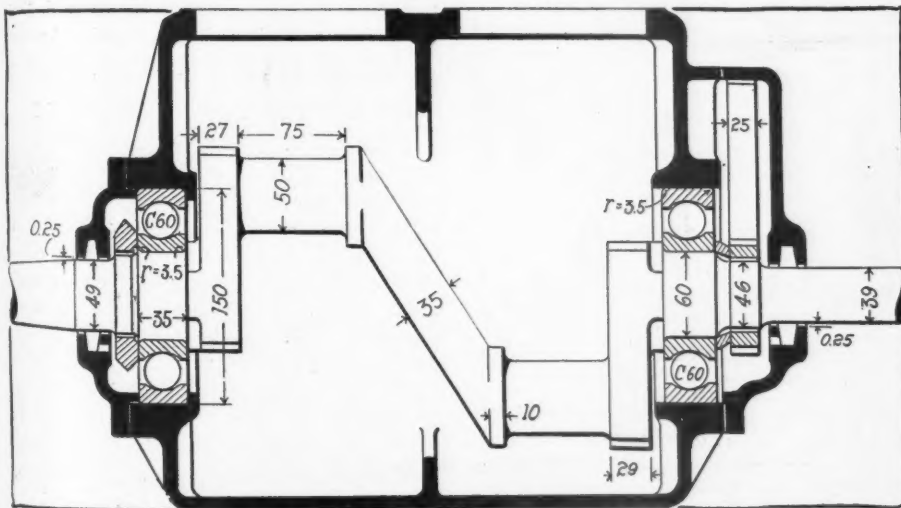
DOUBLE OFFSET CRANKSHAFT ON F & S BALL BEARINGS
